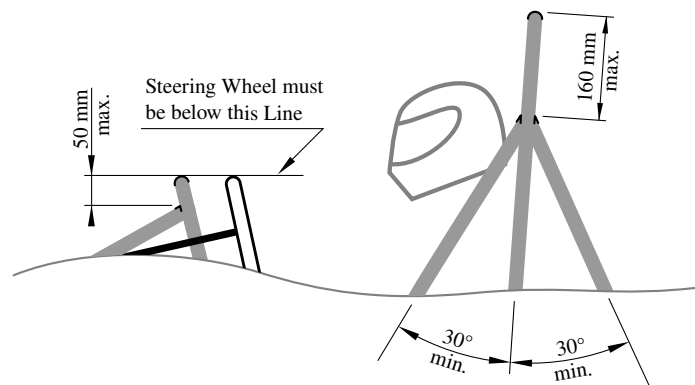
Front hoop bracing, main hoop bracing and steering wheel requirements
